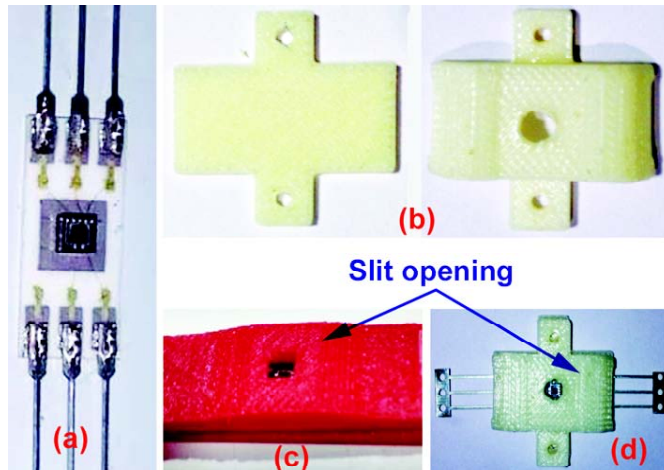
(a) Pressure sensor before 3D printing mounted on ceramic header; (b) stages for packaging of pressure sensor using 3-D printing; (c), (d) Packaged sensor using 3-D printing
